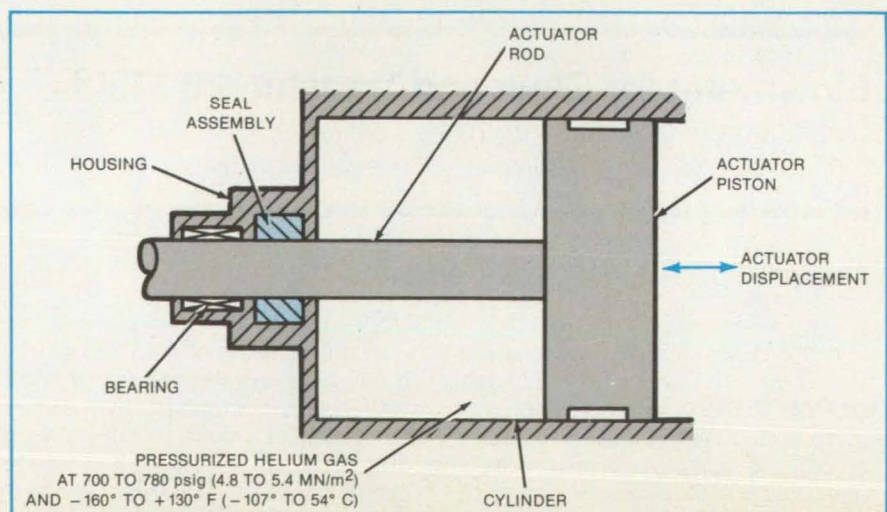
The Seal Assembly is shown in relation to the other parts of the actuator system.
